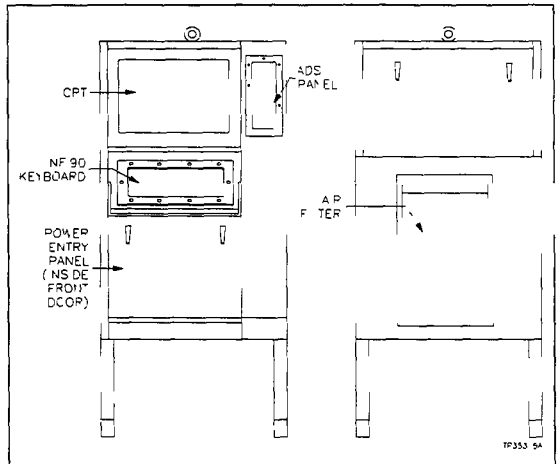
7 I/OIC203 Environmental Cabinet Front and Rear Views
